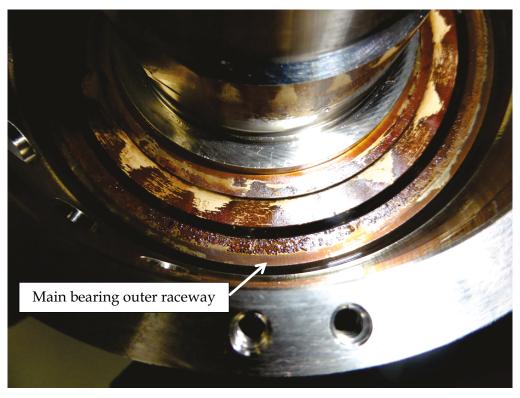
RTM322 main bearing showing localised quinizarate and corrosion (image courtesy Safran HE)
